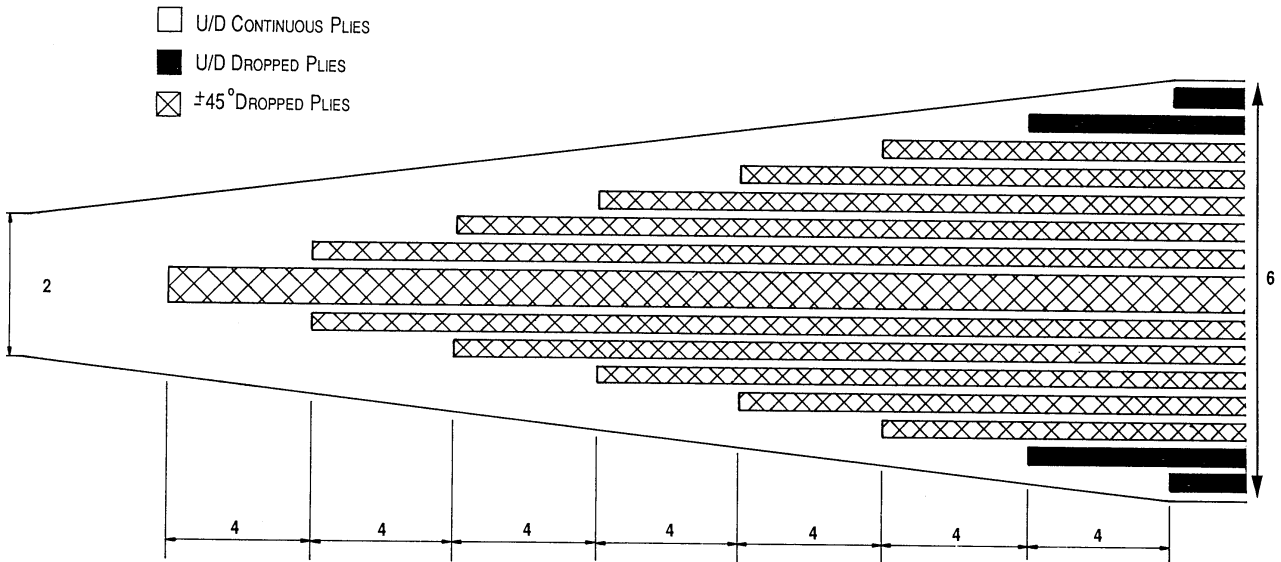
Schematic of layup of baseline tapered tension specimen (dimensions in mm)
